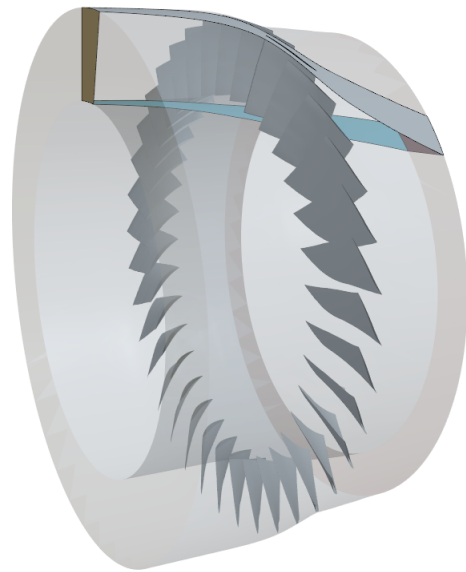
Lateral view of the ROTOR 37 CAD model
